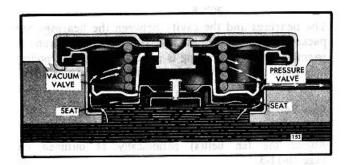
Pressure Control Cap (Pressure Valve Open)
